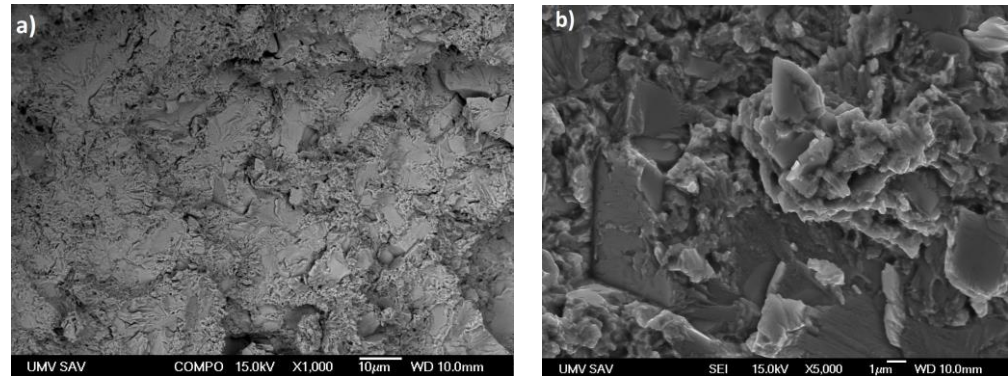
(a) Characteristic fracture surface of the alloy Zn-0.4Mg-0.4Ca-1.1Mn after tensile test, (b) detail of fracture surface.
